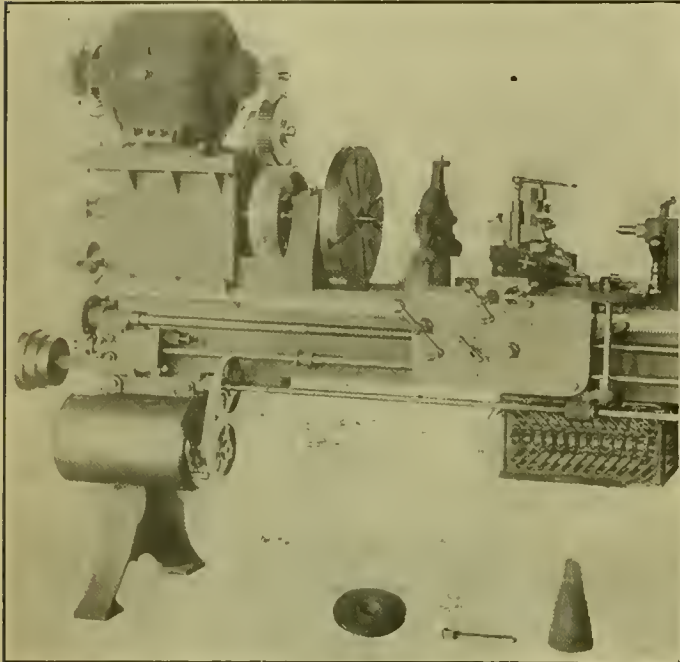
GEARED HEADSTOCK DRIVE UPON A 16-INCH BLAISDELL LATHE.— 2 H. P. BROWNING VARIABLE-SPEED MOTOR.
